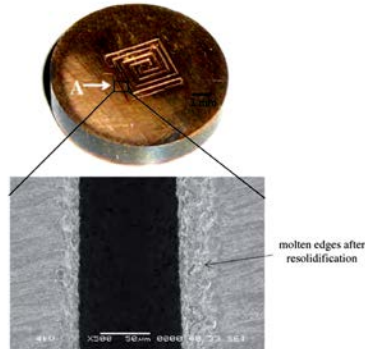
Swiss roll combustor mold fabricated using Micro EDM milling [14]
